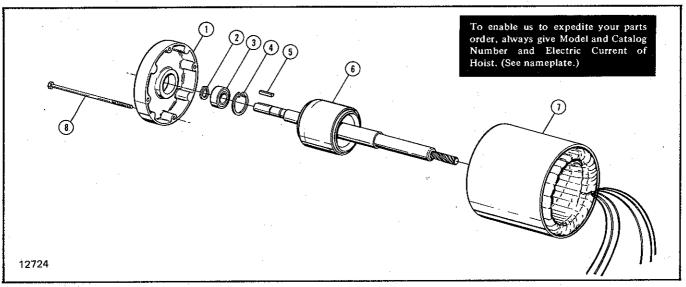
THREE PHASE MOTOR ASSEMBLY - TWO SPEED
